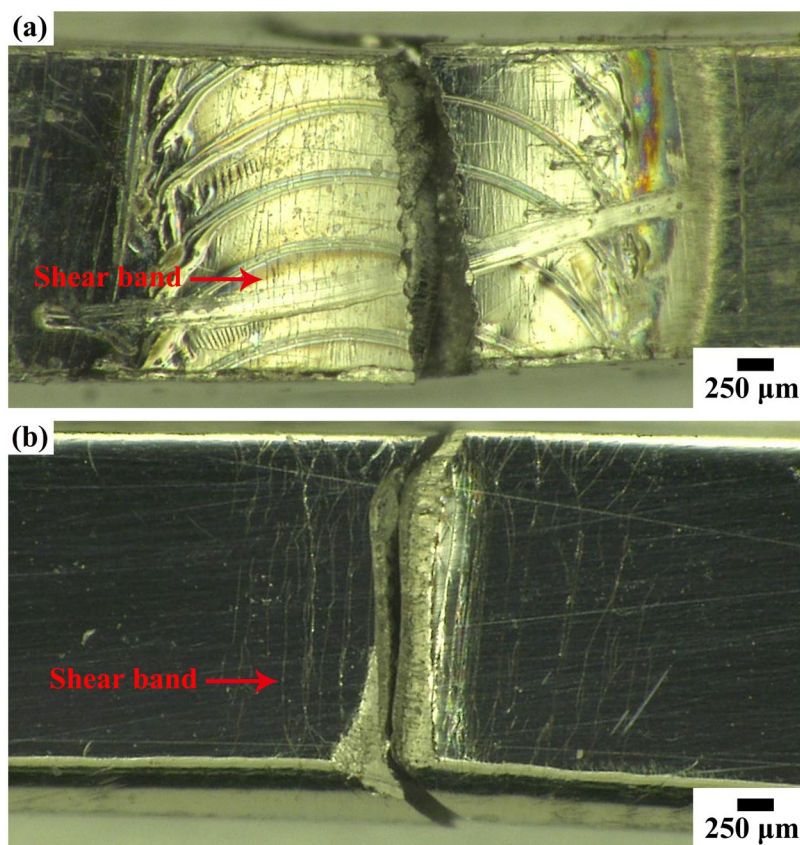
Fracture morphology after bend tests of $Pd_{43}Cu_{27}Ni_{10}P_{20}$ bulk metallic glass: (a) weld joint; (b) base material.
